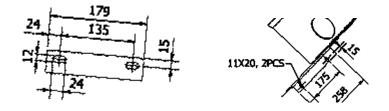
A recommended style for slot dimensioning should be done like in the view B. Other option is shown in the view A.
